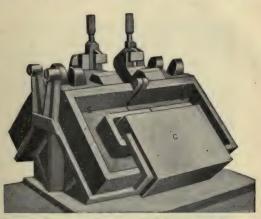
Alternating Current Transformer of Thomson Electric Welder. S, S, S, Copper Secondary Coil; C, Laminated Core of Transformer.
